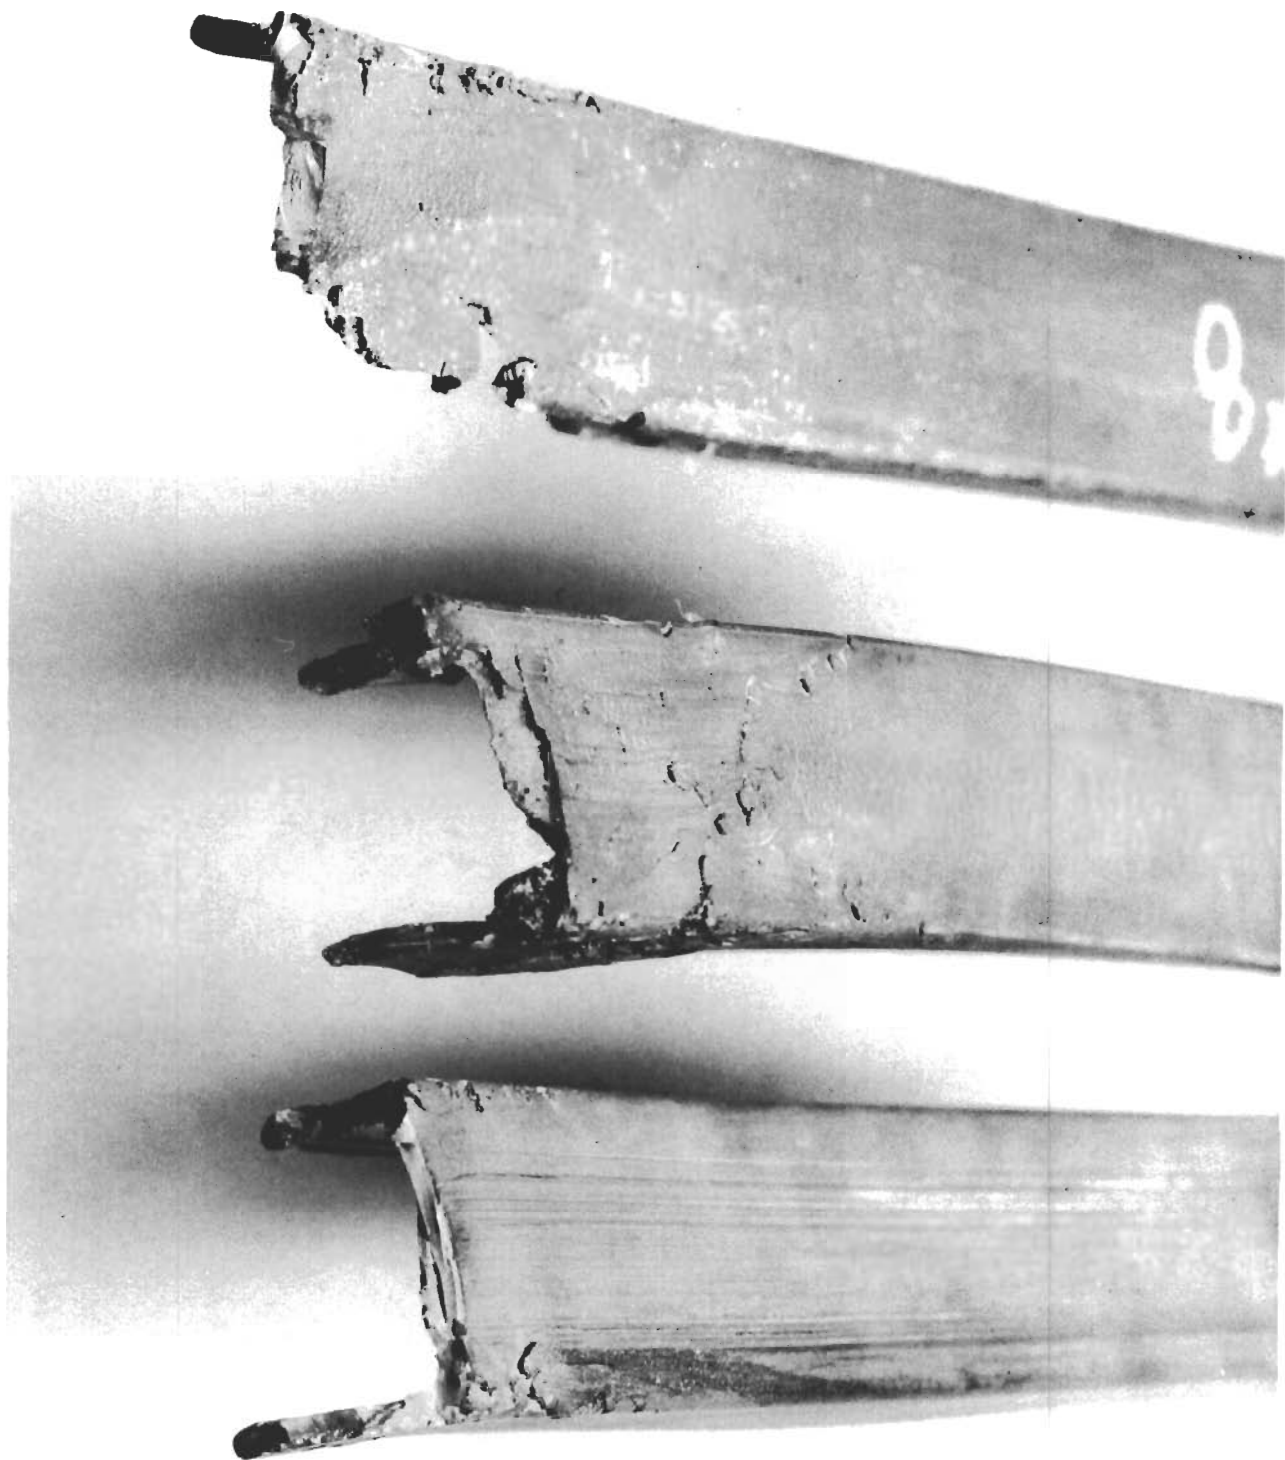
BUTT END, BOTTOM VIEW, WOLVERINE BERYLLIUM EXTRUSIONS
